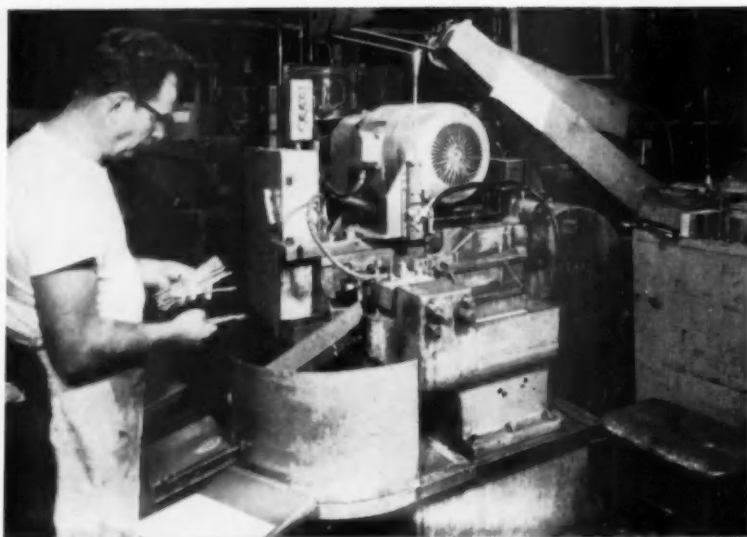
This Waterbury - Farrell machine is the last one in the line for machining motor shafts. The operation at this point is the rolling of the knurled end.
